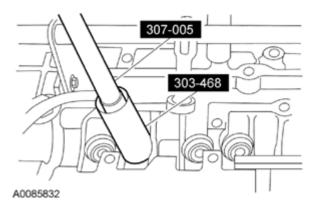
Removing Valve Seal Using Valve Stem Oil Seal Remover And Slide Hammer Courtesy of FORD MOTOR CO.
